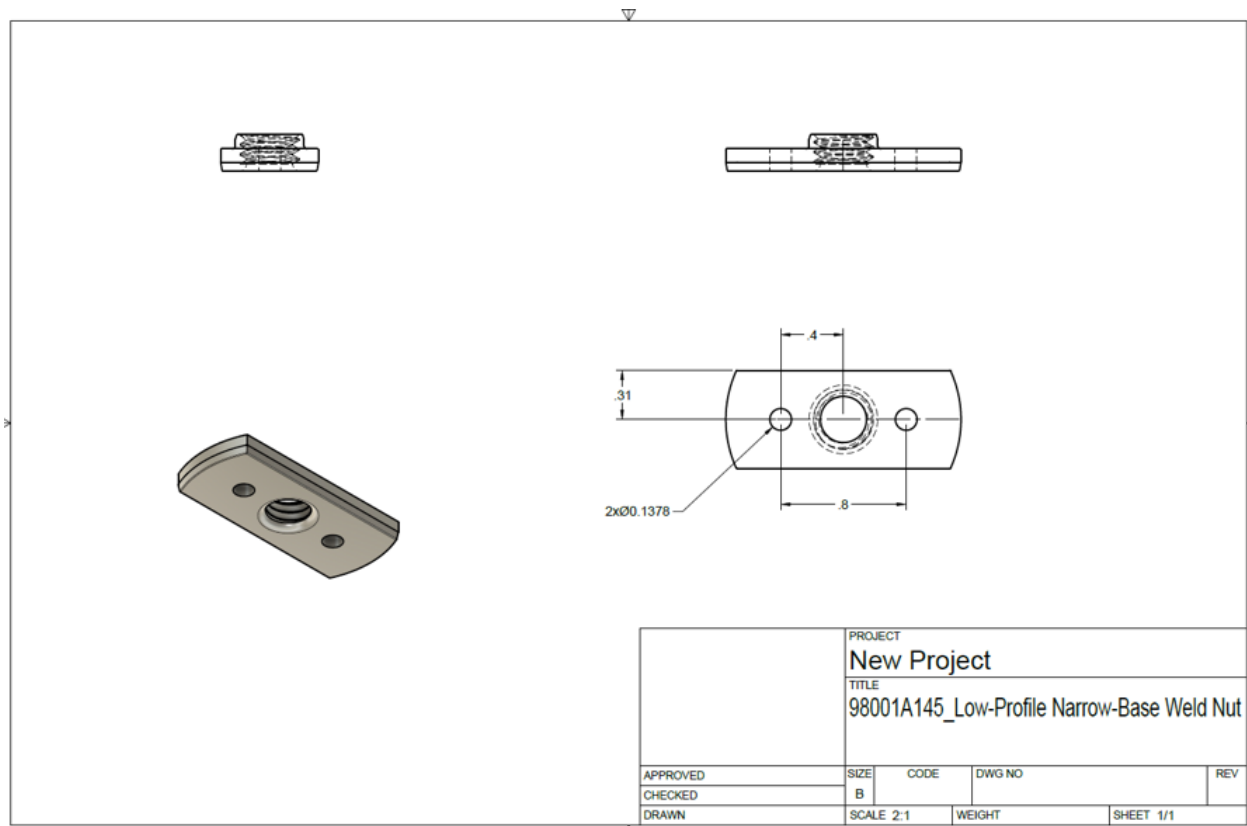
Weld Nut used for locking the transverse motion of the threaded rod used for applying controlled pressure.
